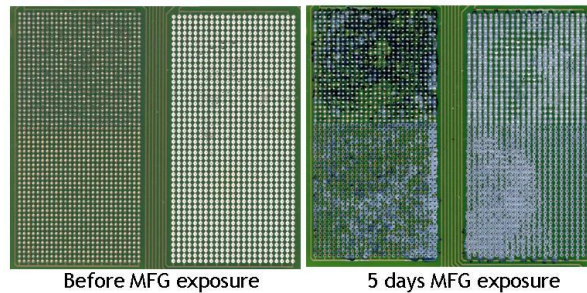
Board assembled with aqueous based ORL0 wave soldering flux
